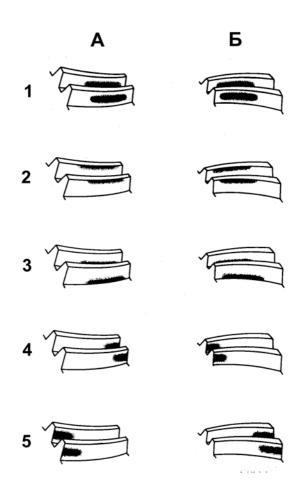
Final drive gears tooth-contact pattern: A – forward speed sides; B – reverse speed sides; 1 - correct tooth-contact pattern; 2 – tooth-contact pattern is located at the tooth tip – to correct, move the drive gear towards the driven gear; 3 – tooth-contact pattern is located at the tooth root – to correct, move the drive gear away from the driven gear; 4 – tooth-contact pattern is located at the narrow tooth end – to correct, move the driven gear away from the driven gear towards the driven gear.
